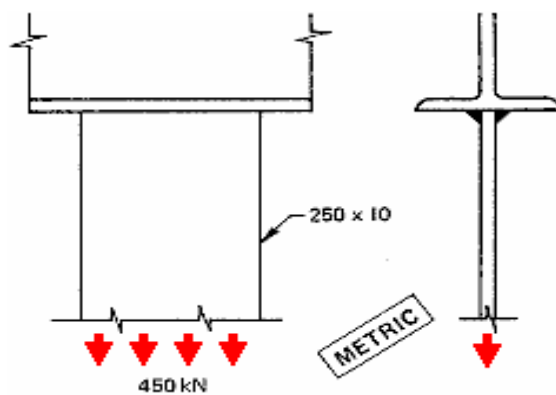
Bar fillet welded both sides.
